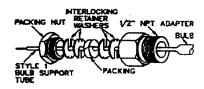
Part No. FTG13A-600R packing nut assembly. (Used with swaged bulb with support tube for direct immersion application.)
